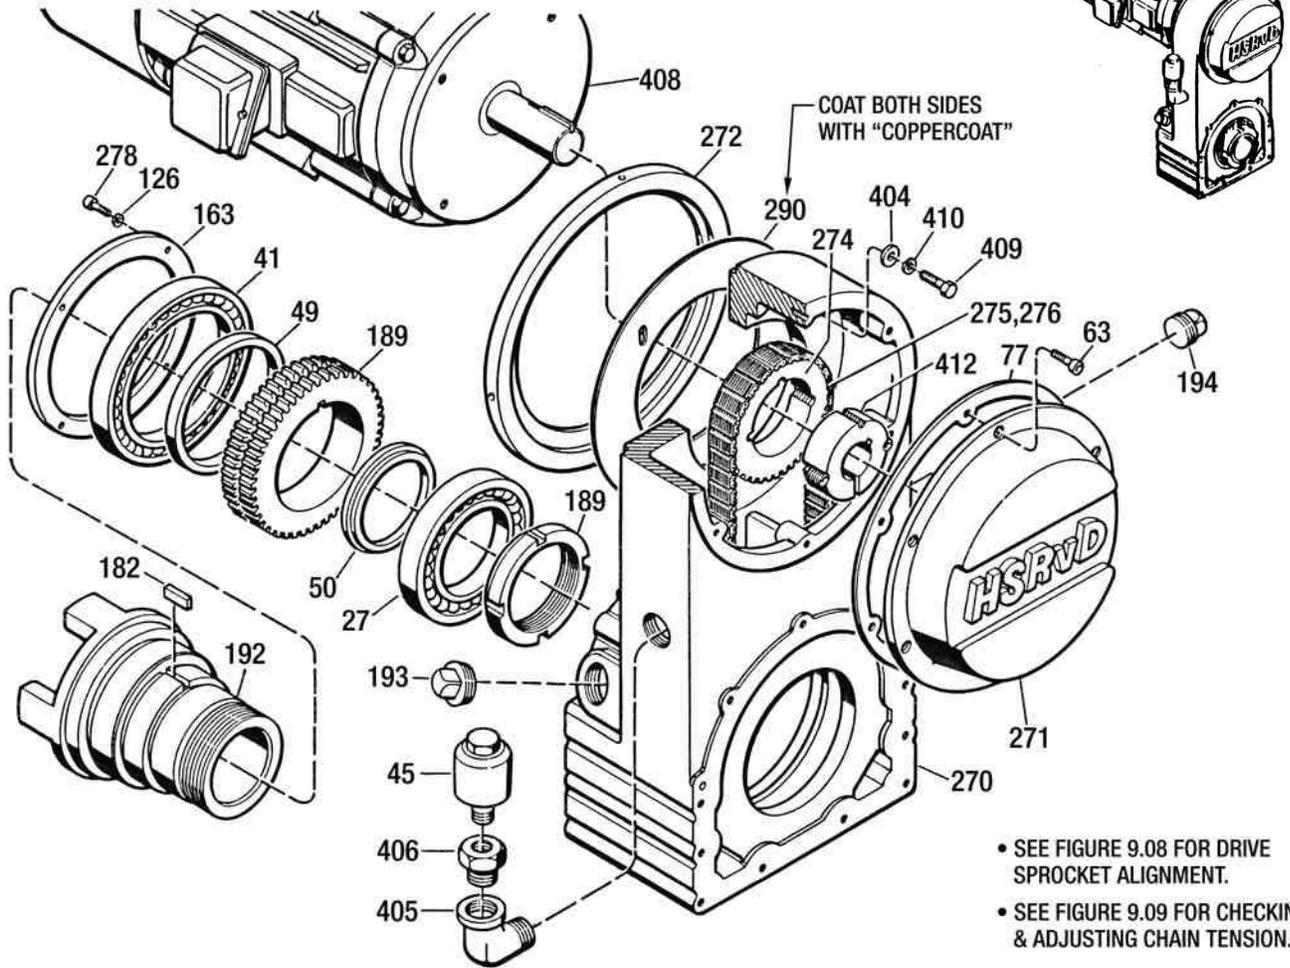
Secondary Input Housing Sub-Assembly - High Speed Reversing Drive (HSRvD)
